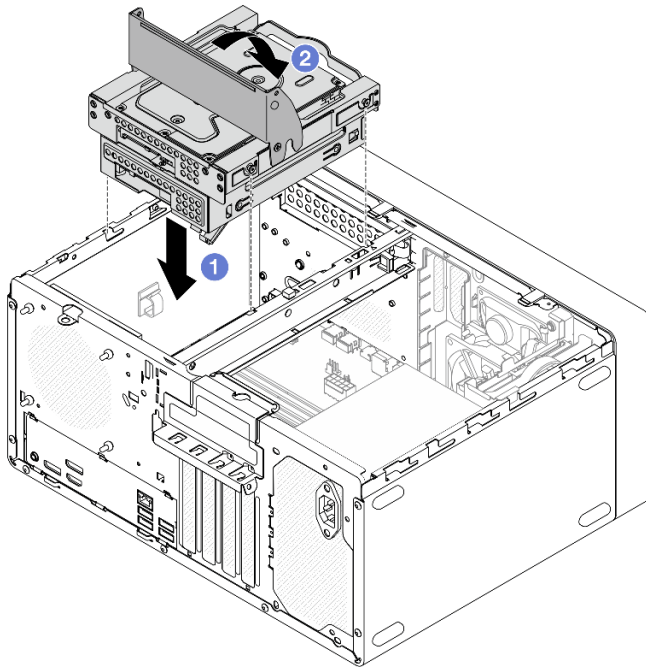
Installing the bay 2+bay 3 drive cage assembly
